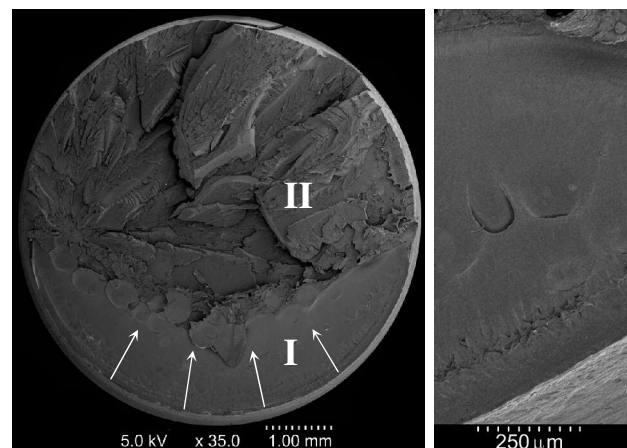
Left; fatigue fracture surface: I) stable fatigue crack growth and II) fast fracture. Right; higher magnification view of I.
